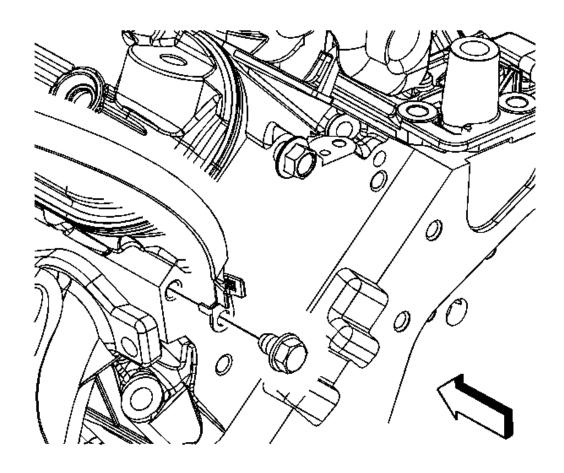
View Of Engine Ground Strap & Bolt Courtesy of GENERAL MOTORS CORP.
